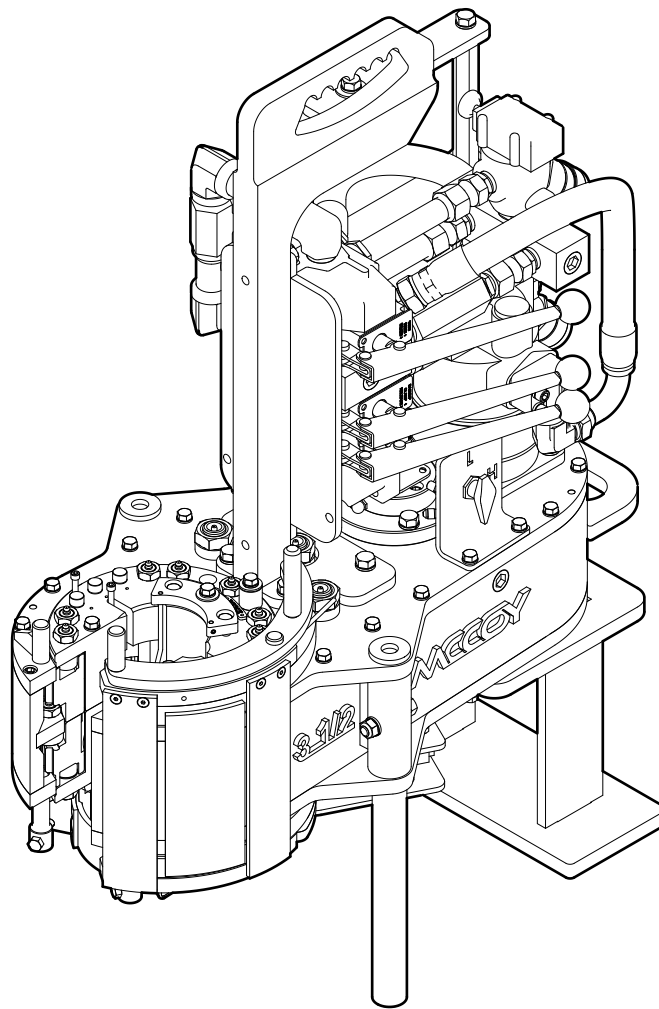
80-350-650-000-000-30-00 Power Tong & Mounting Kit
